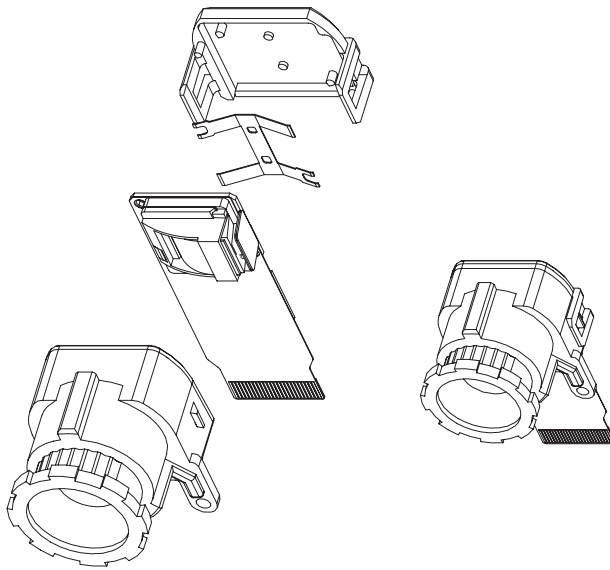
Exploded view of reflective microdisplay viewfinder, showing magnifier, microdisplay with illumination unit, and enclosure. Assembled depth is 30 mm and total weight 5.33 gm. Reprinted courtesy of Displaytech Inc.
